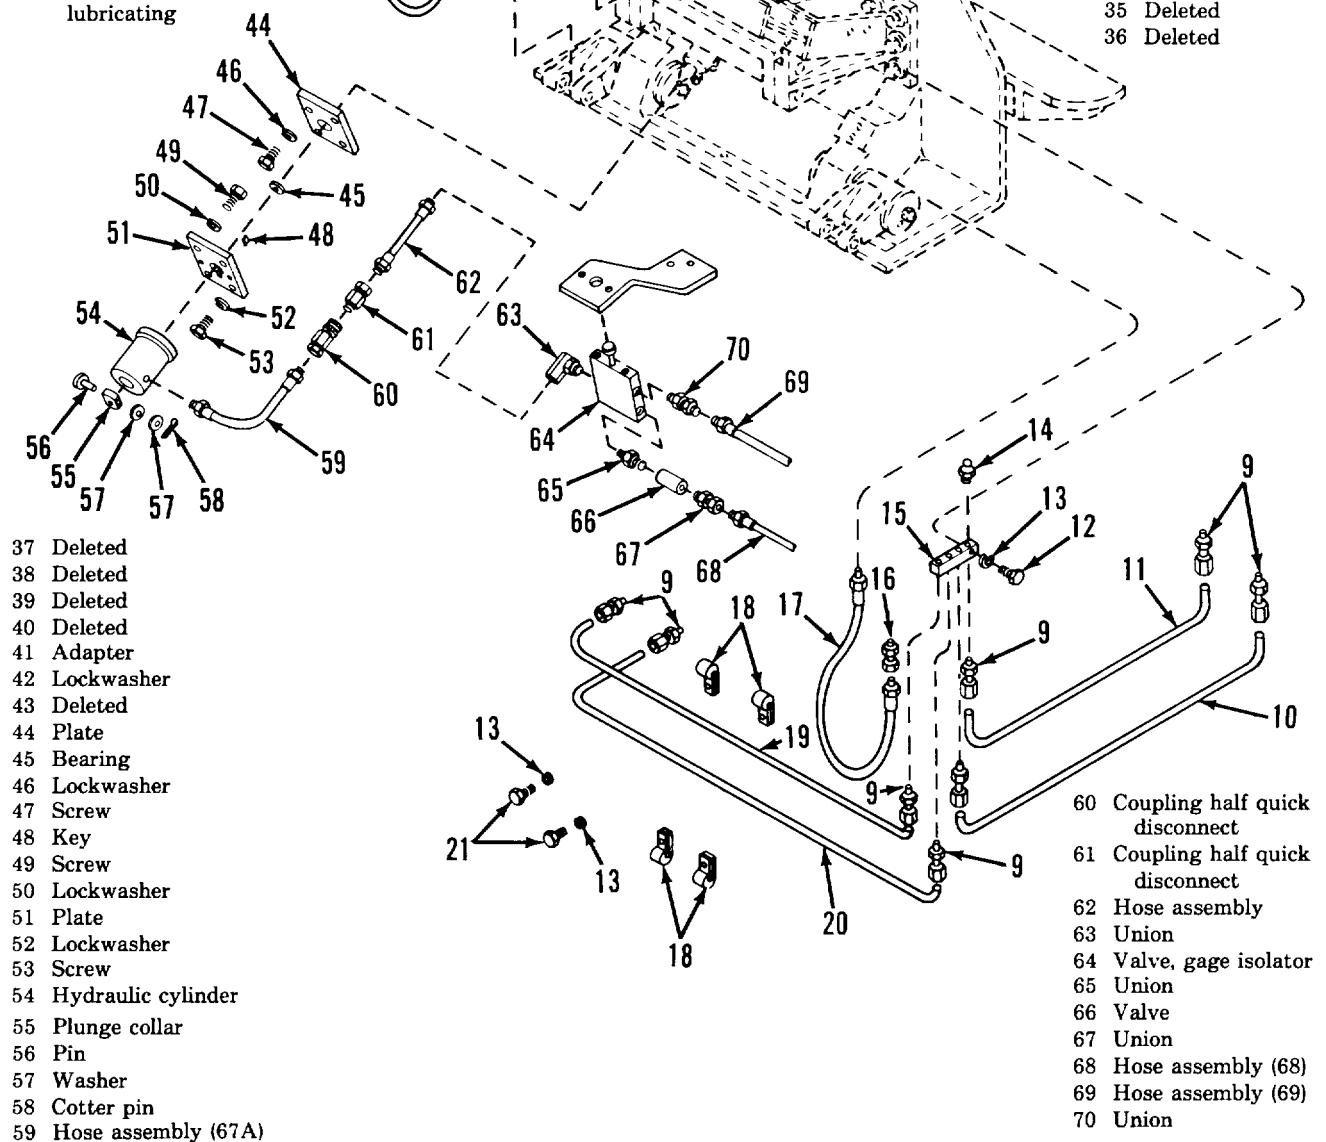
Cover assembly and lubricating lines, mechanical spade release.
